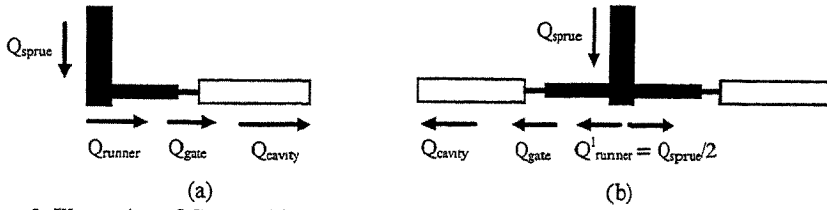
Illustration of Composition Scheme. (a) Single-cavity Molding. (b) Multi-cavity Molding.
